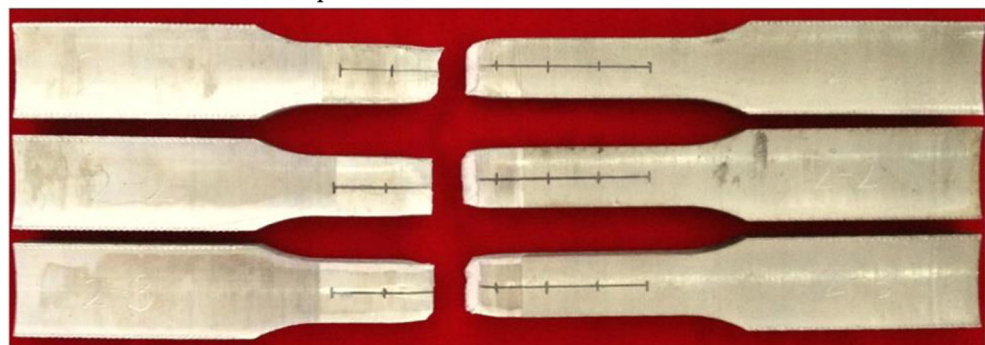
The fracture surface and fracture location of the specimens after tensile tests
